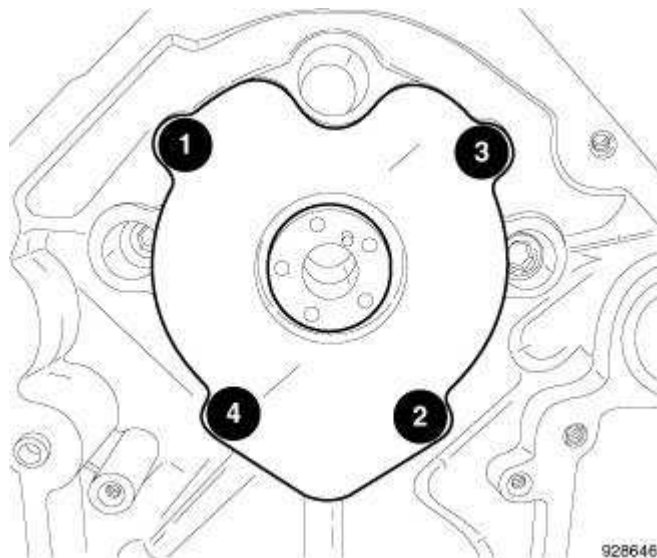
Camshaft Thrust Plate Bolt Tightening Sequence
